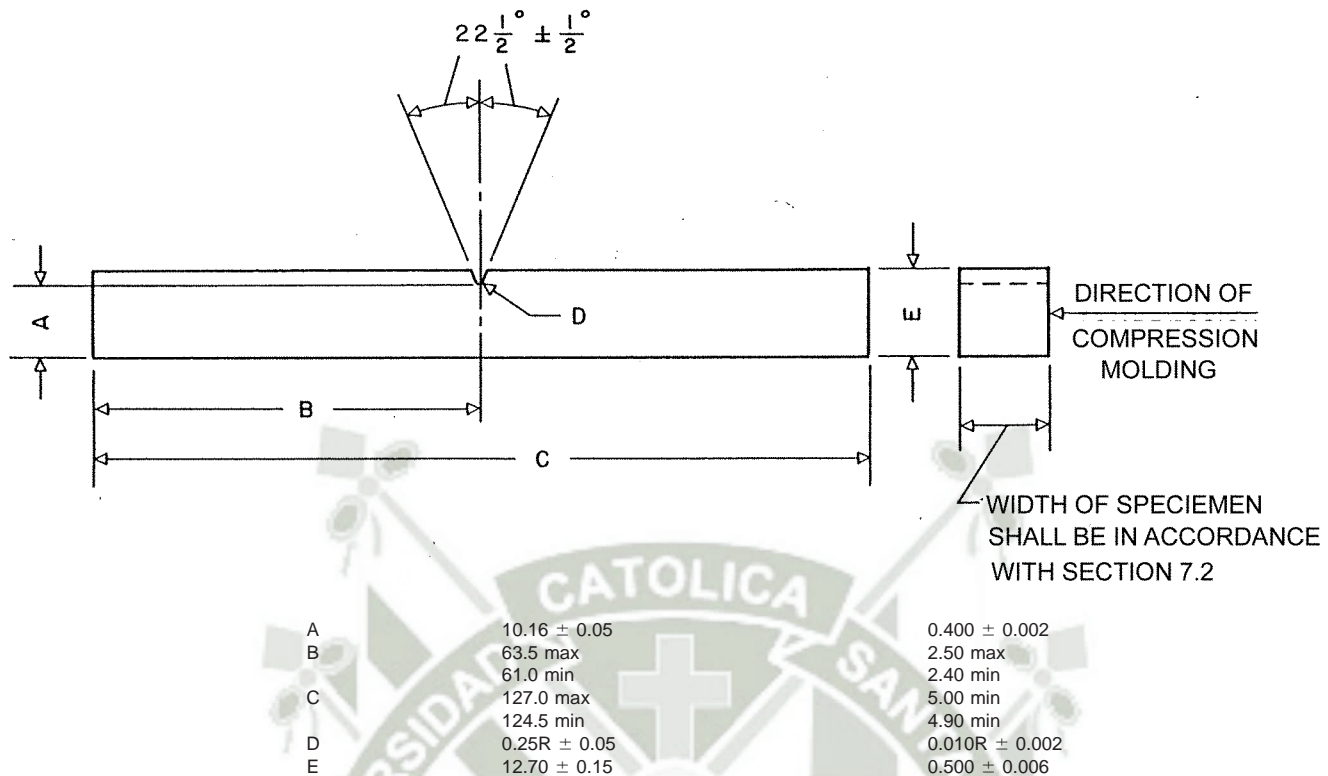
Dimensions of Simple Beam, Charpy Type, Impact Test Specimen
